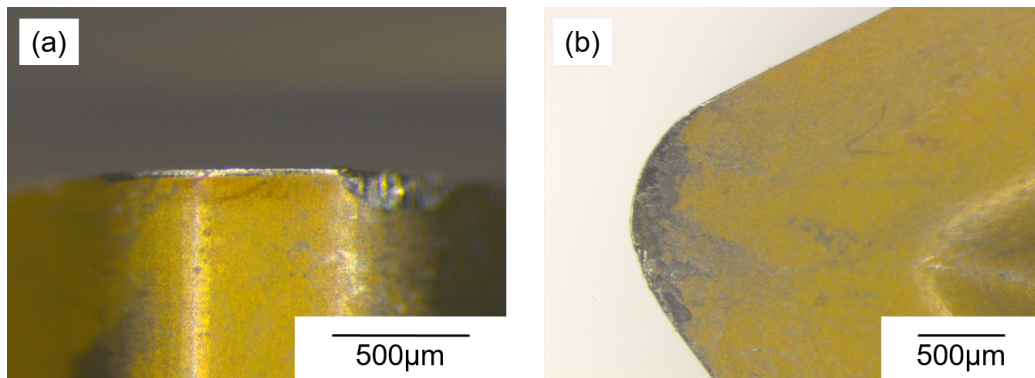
Example tool wear produced during face turning of face 3 on billet 3_2. The tool shown was used during the 2rd repeat of face 3. The tool shown is representative of all passes performed on face 3.
